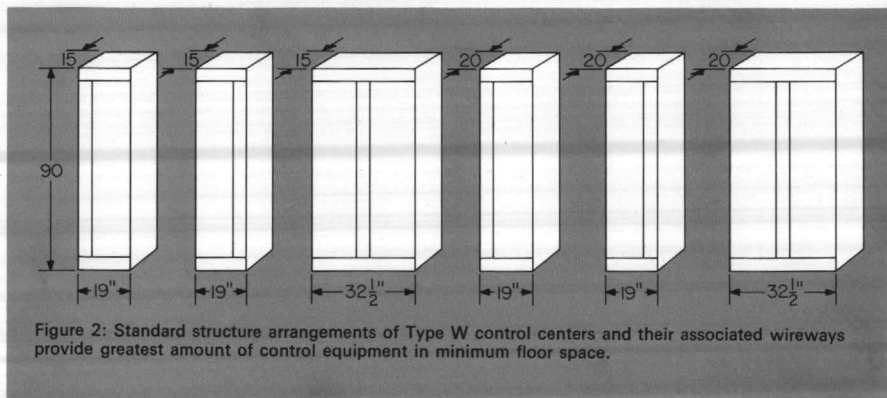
Standard structure arrangements of Type W control centers and their associated wireways provide greatest amount of control equipment in minimum floor space.
